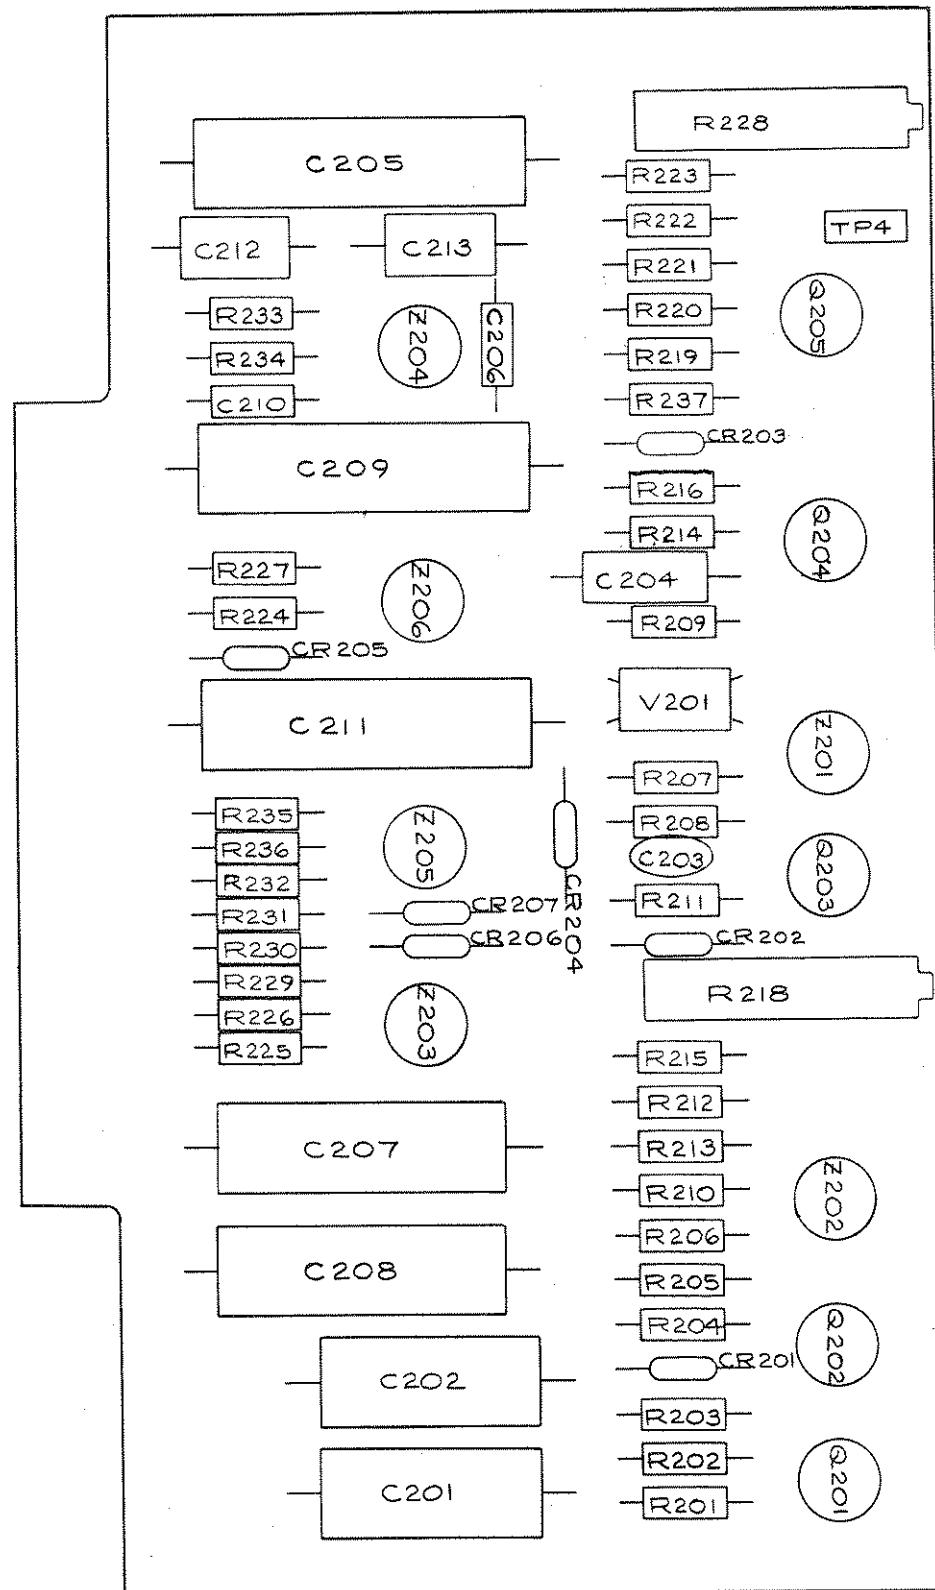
REFERENCE BOARD ASSEMBLY
